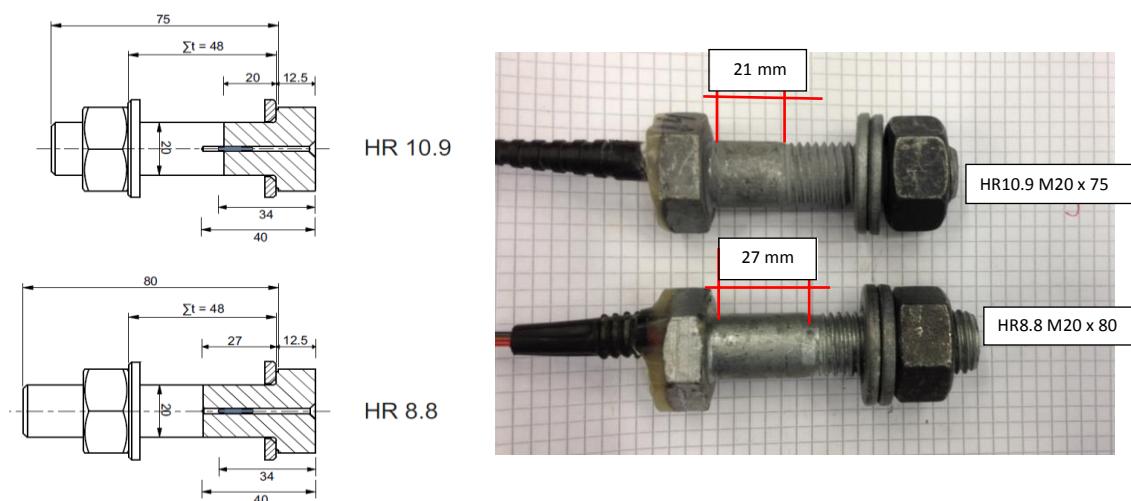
HR bolt sets used in the slip factor experiments in task 2.1. The drawing indicates the position the stain gauges in the bolt shank. Bolts were instrumented by UDE.
